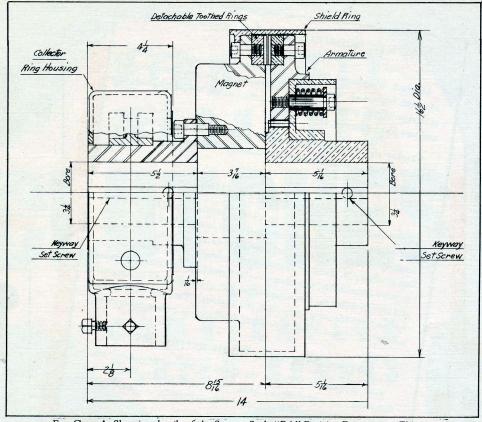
A. Showing details of the Stearns Style "PA" Positive Engagement Clutch
